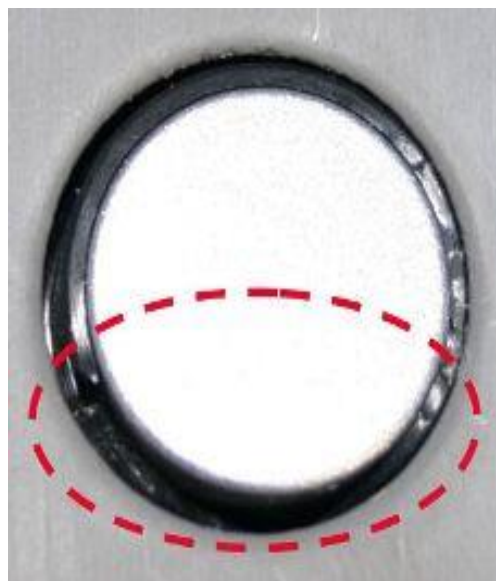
An incorrectly seated decoupling ring (bulging).
